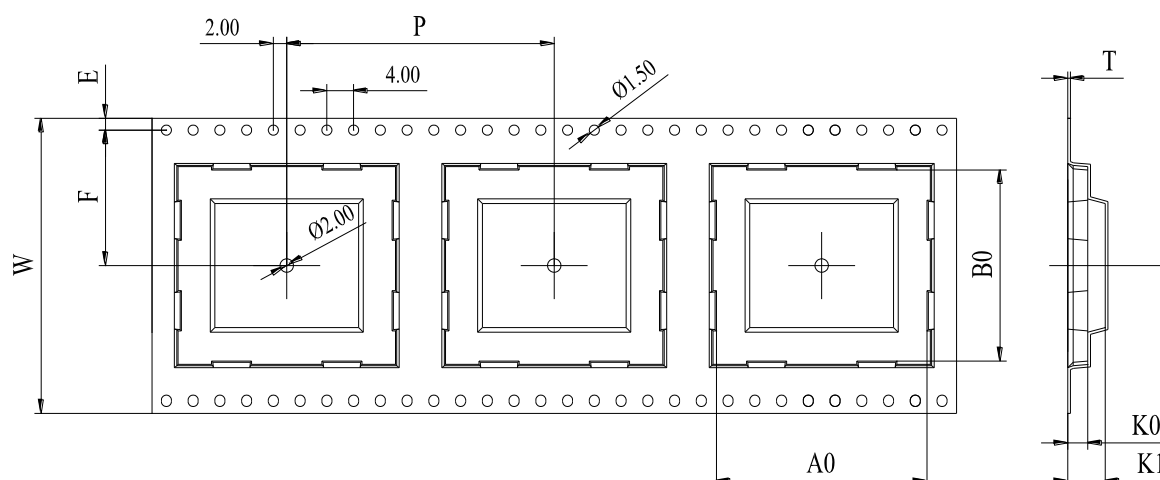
Carrier Tape Dimension Drawing (Unit: mm)
